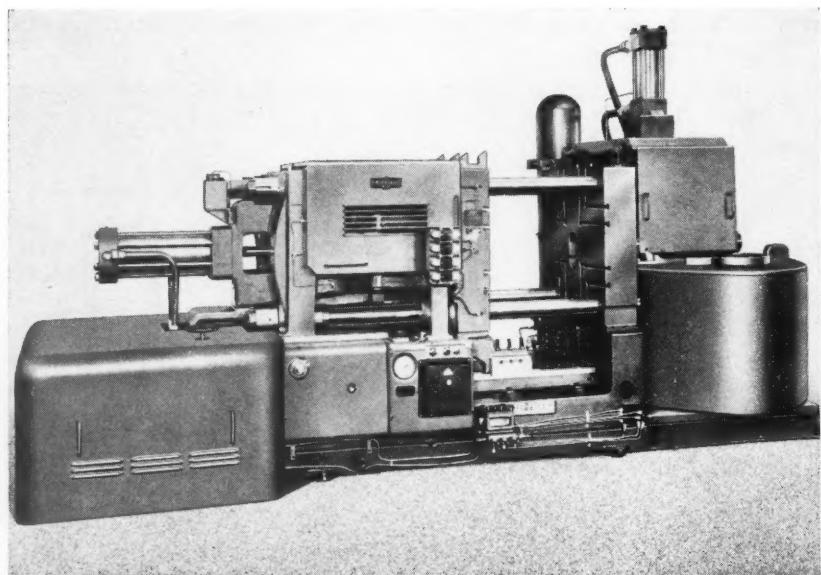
Reed-Prentice die-casting machine with high-pressure gooseneck attachment
